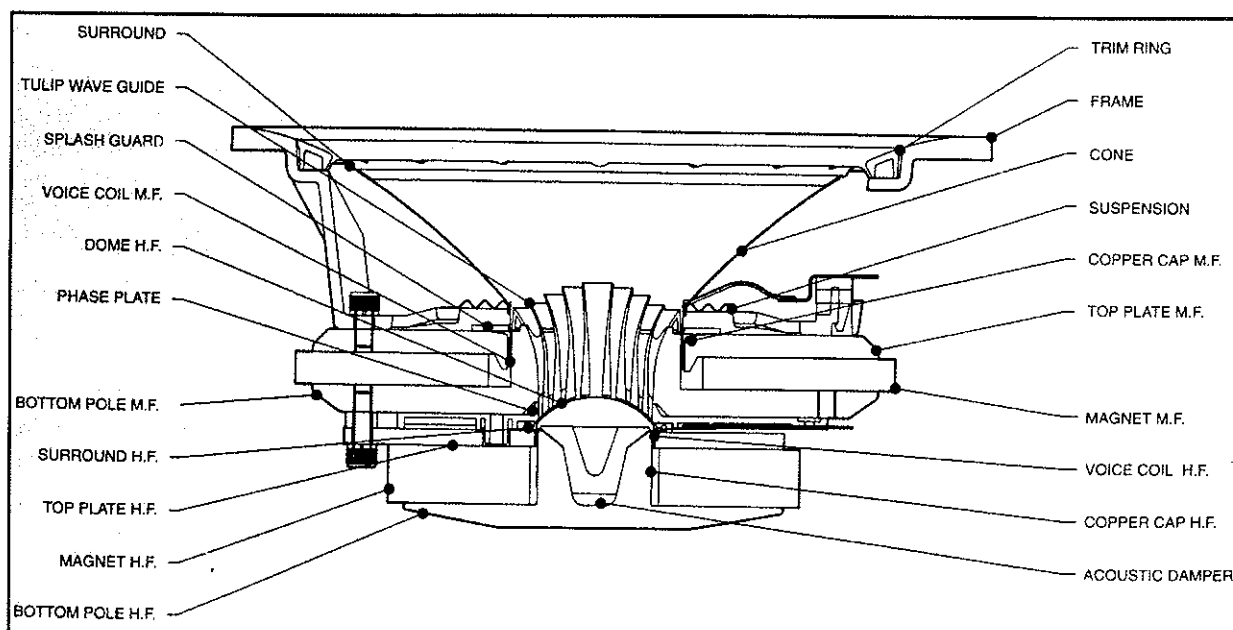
Sectional drawing of a typical coaxial driver showing details of the major component parts. (Tannoy Super Dual Concentric). Drawing courtesy of Tannoy.
